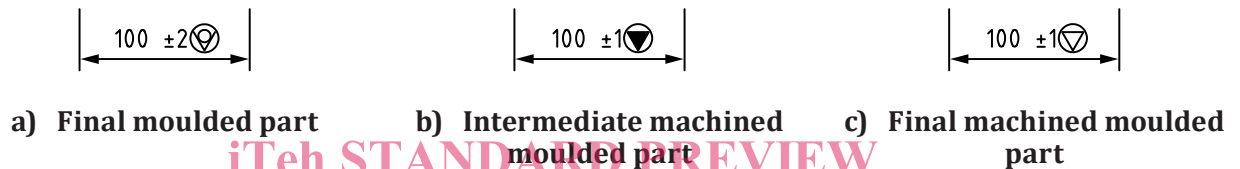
Examples of nominal dimensions with individual tolerances
